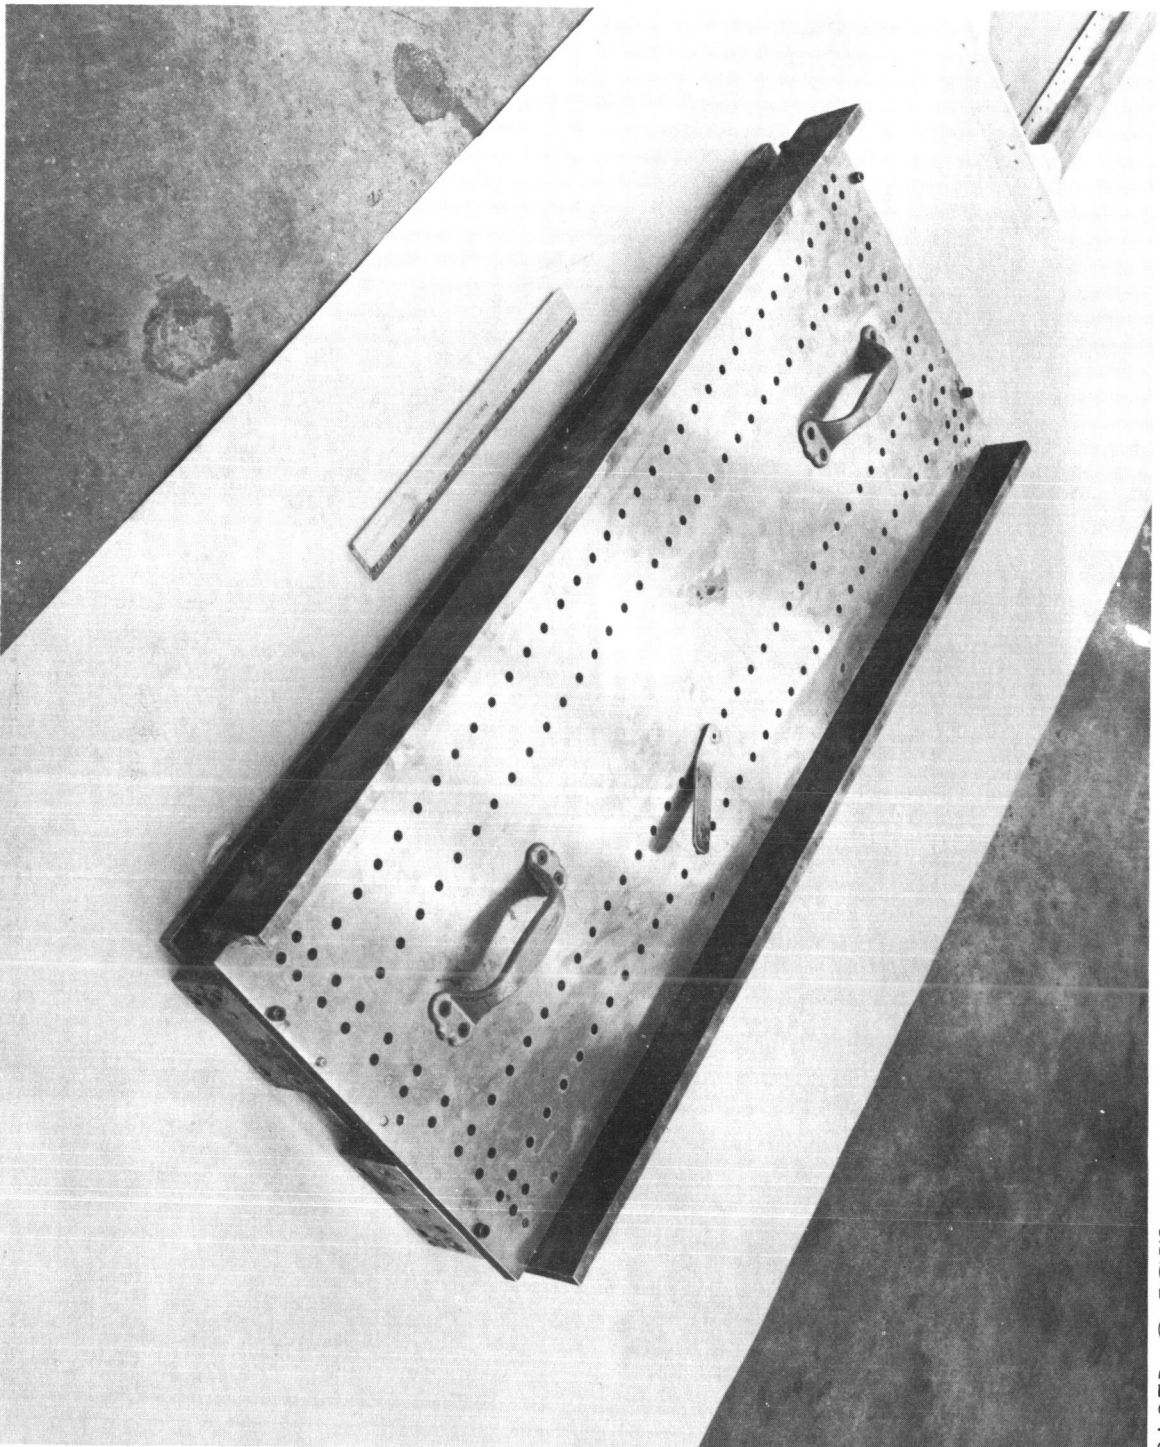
DRILL JIG ASSEMBLED FOR DRILLING
